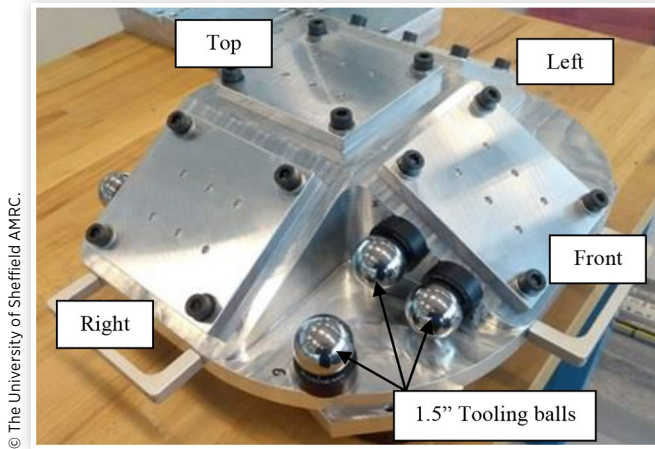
The fixture used for drilling trials. Three of the SMR nests are shown, with the remaining three on the back face of the fixture.
